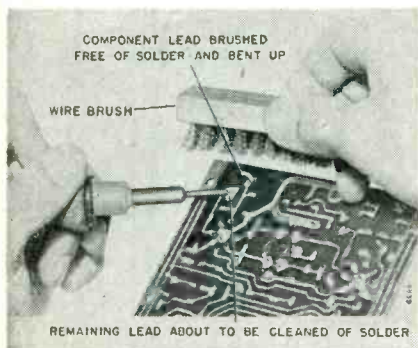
Removal of component mounted in such a manner that its leads cannot be cut to free it from the board.
